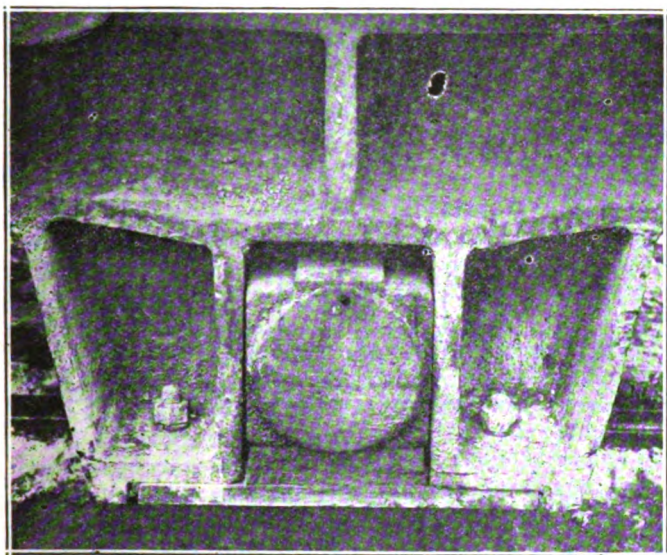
Showing simple, compact, protected Hyatt Roller Bearing box for steel mill cars—the outer end of the box is closed except for a small oil hole, and there are no projecting parts or covers to be broken. The whole box can be steadily constructed to withstand the use and abuse that steel mill equipment receives.
